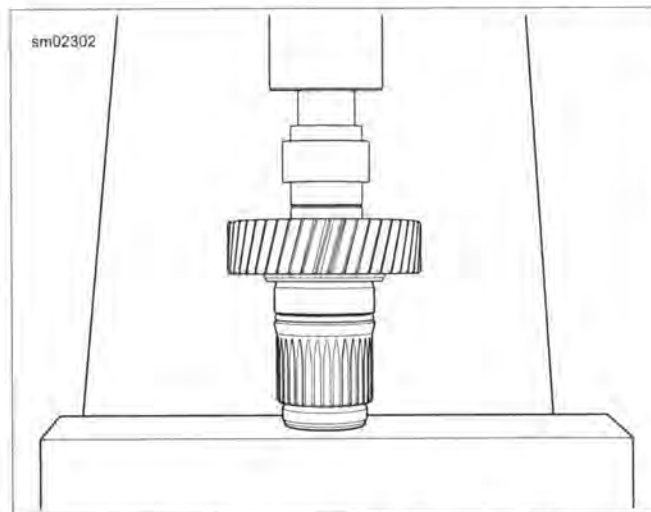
Installing Inner Needle Bearing in Main Driver Gear
